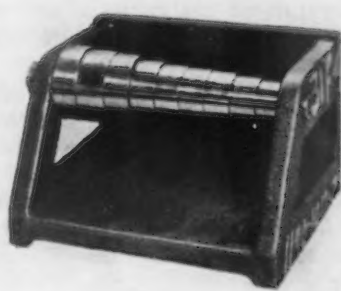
For finishing the outer surface on a cast iron turning head, a surface grinder of this type is employed. The work, 13 in. long and 7-in. wide, is held in a special fixture on the magnetic chuck.
